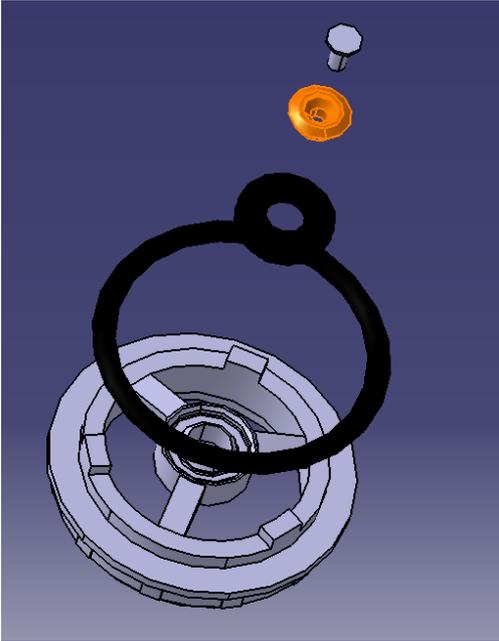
Exploding view on all the valve seat parts created in Catia V5.
